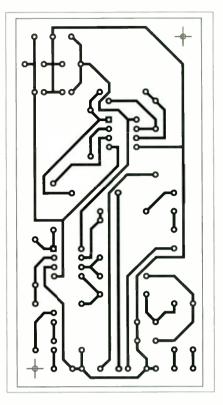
Scan this full-size PCB layout into your computer, and use a TTS kit to make your own printed circuit board.
